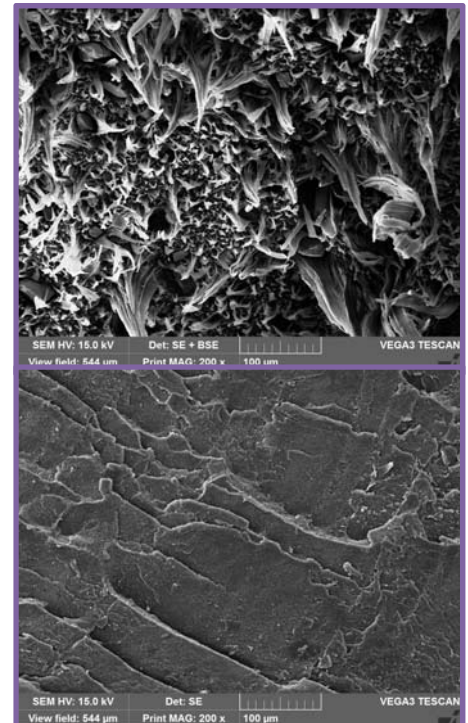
SEM images showing ductile (upper) and brittle (lower) fracture surfaces.
